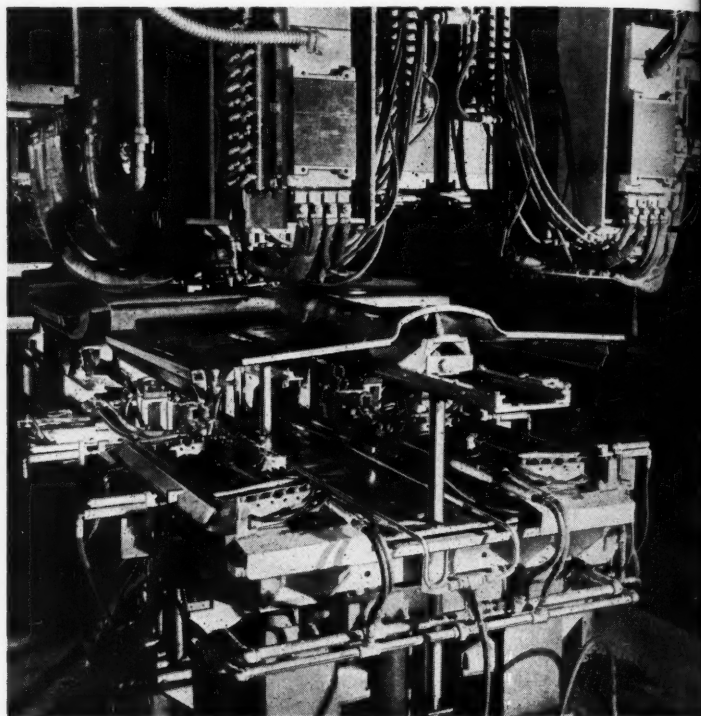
Completely welded front floor-pan assembly is automatically transferred to a second machine, as shown in the illustration at the right, where it is welded to the rear floor pan
